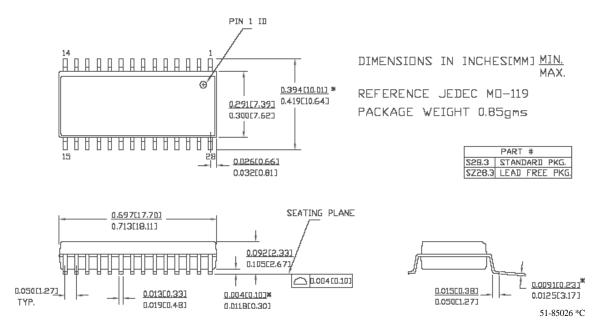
28-Lead (300-Mil) Molded SOIC S21
